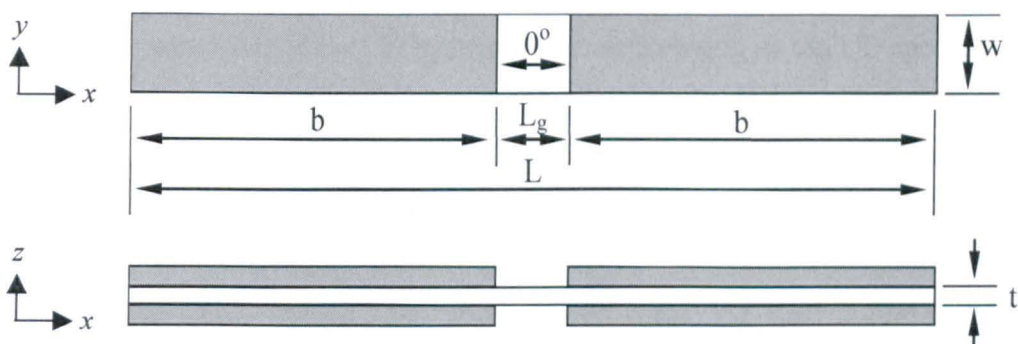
Compression test specimen drawing. Specimen dimensions: L = Total specimen length = 112 mm, L_g = Gauge length = 12 mm, b = Tab length = 50 mm, w = Specimen width = 10 mm, t = Specimen thickness \approx 2.16 mm, GFRP tab dimensions = 50 mm length x 10 mm width x 1.5 mm thickness.
